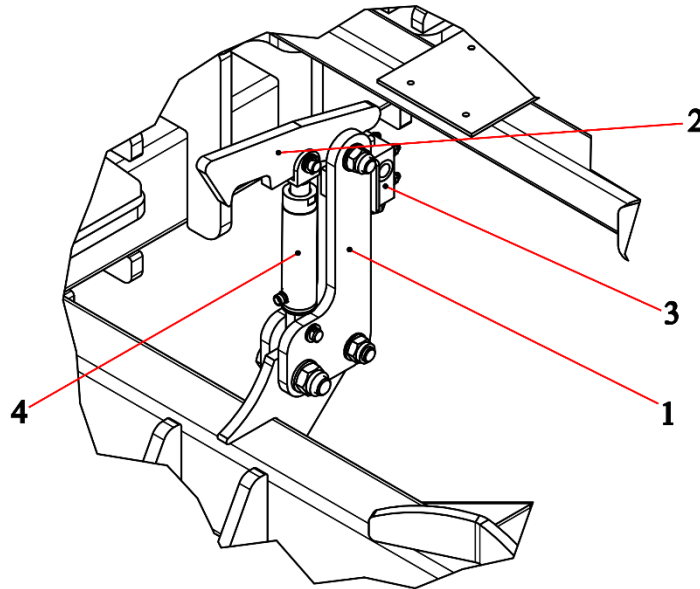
Main frame with automatic wing locking mechanism (1 - sheet metal of automatic locking assembly, 2 - hook of mechanism, 3 - limit valve, 4 - actuator)
